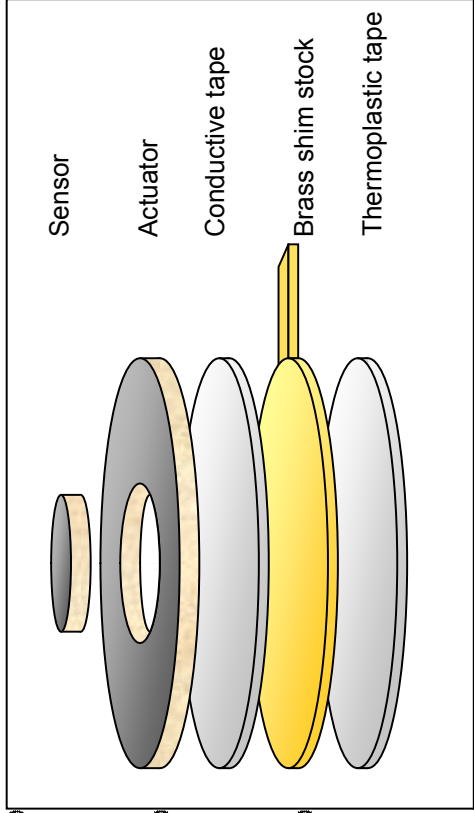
Schematic of complete actuator, sensor, and adhesive assembly
